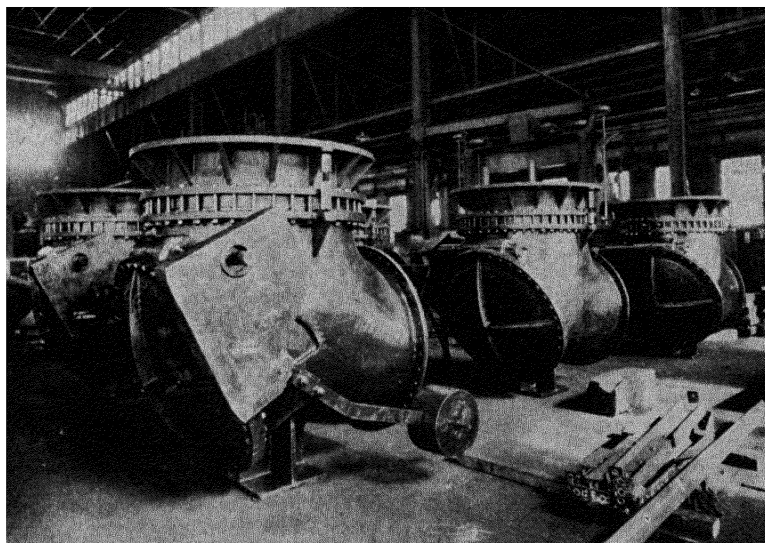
Chimney valve, gas flue located above stove platform. (Courtesy of Freyn Engineering Co.)
